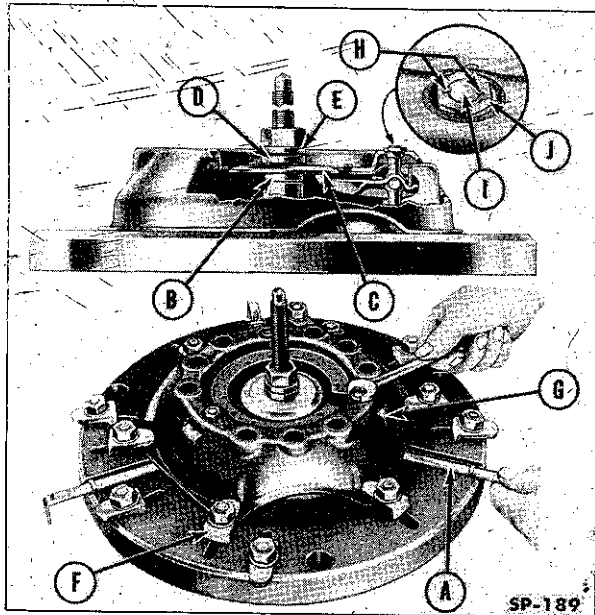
ADJUSTING PRESSURE PLATE LEVERS
